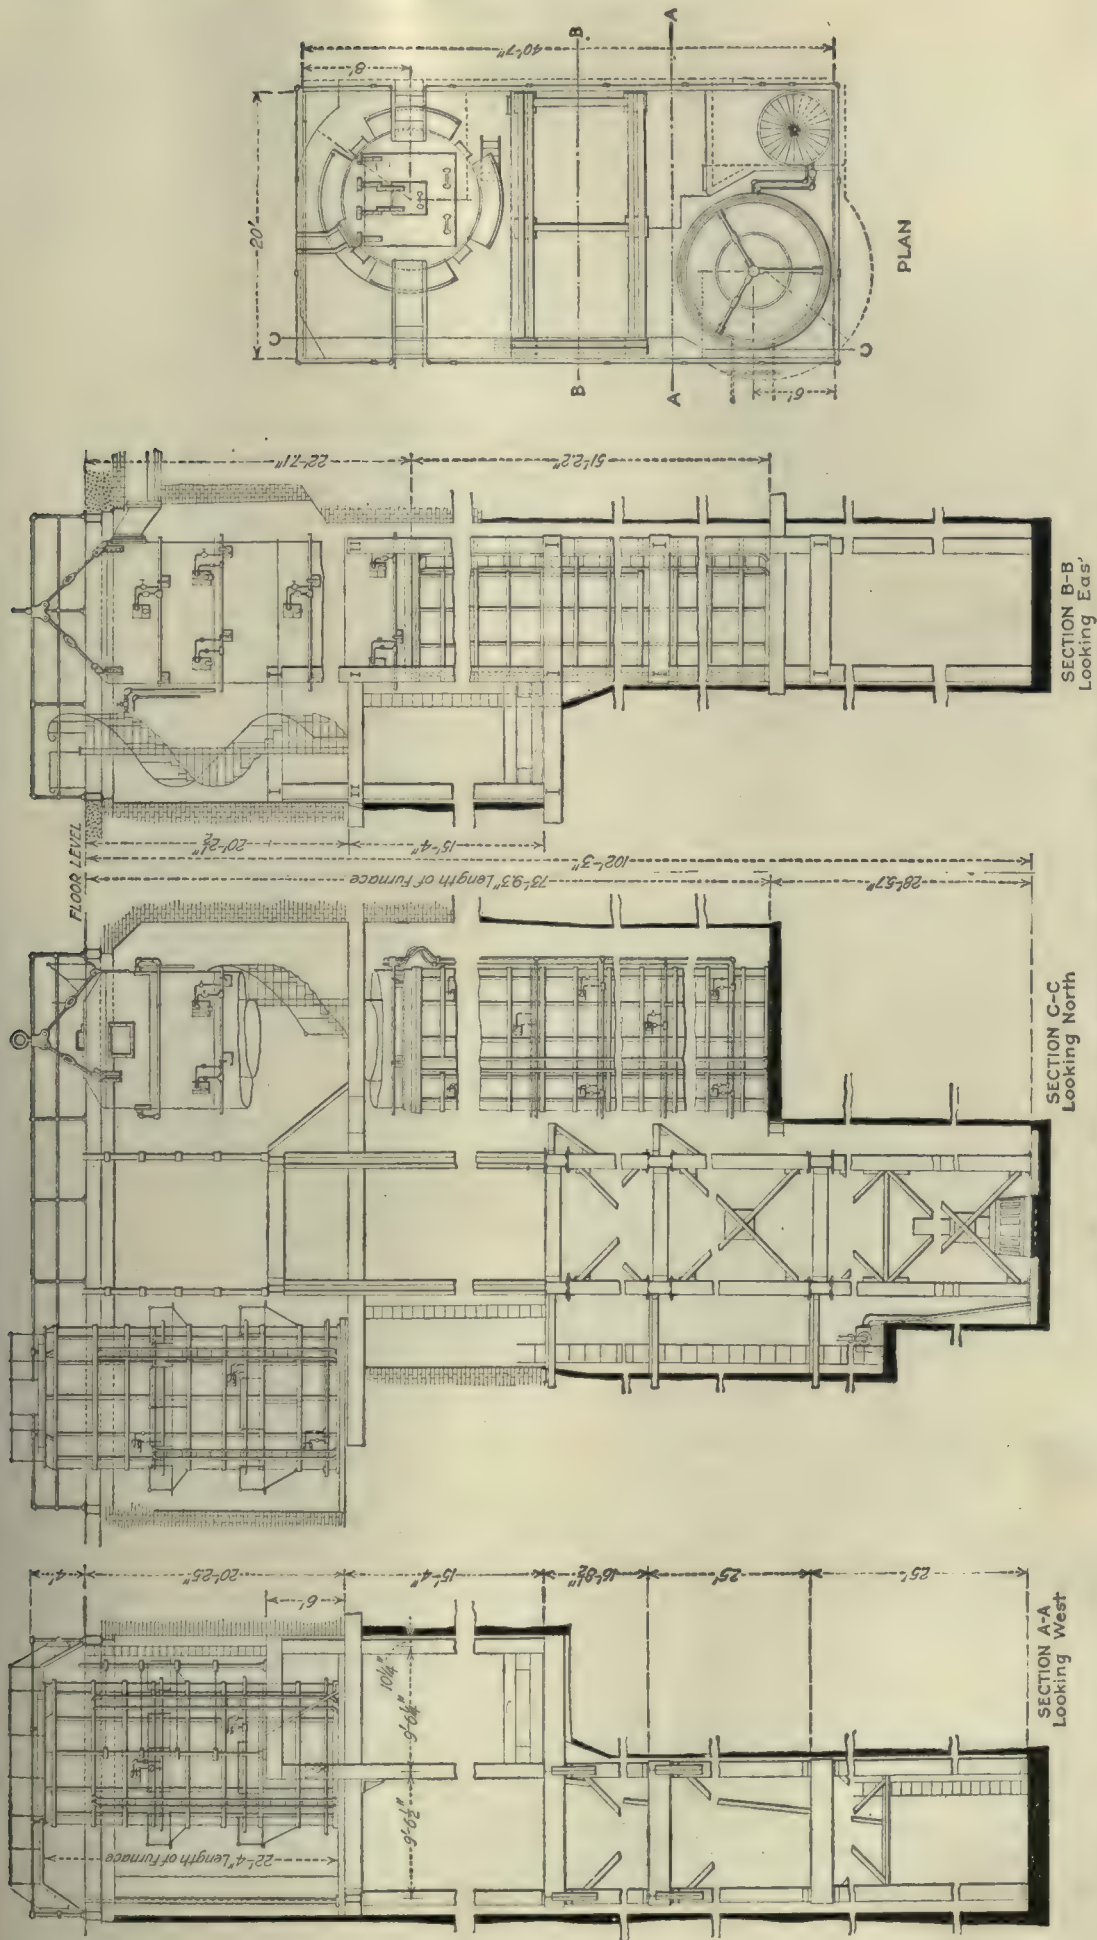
GENERAL DRAWING OF SHRINKING FURNACES
